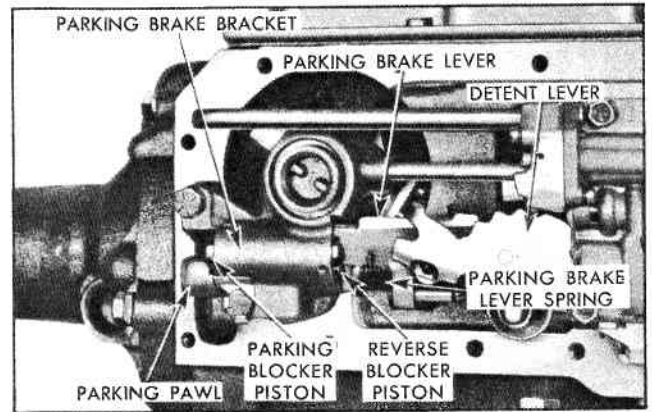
Parking Brake Bracket Assembly (Blocker Pistons in Lockout Position)
